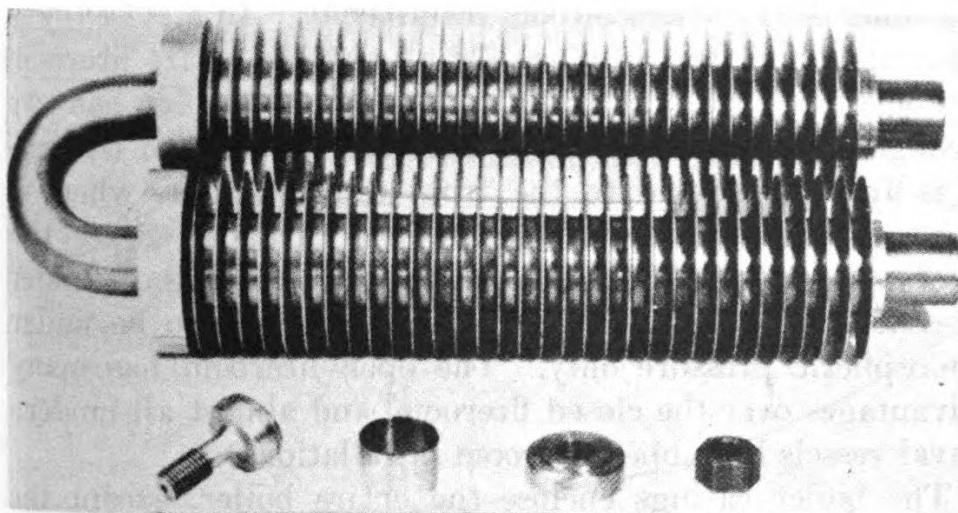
U-bend economizer tube with aluminum gill rings.
